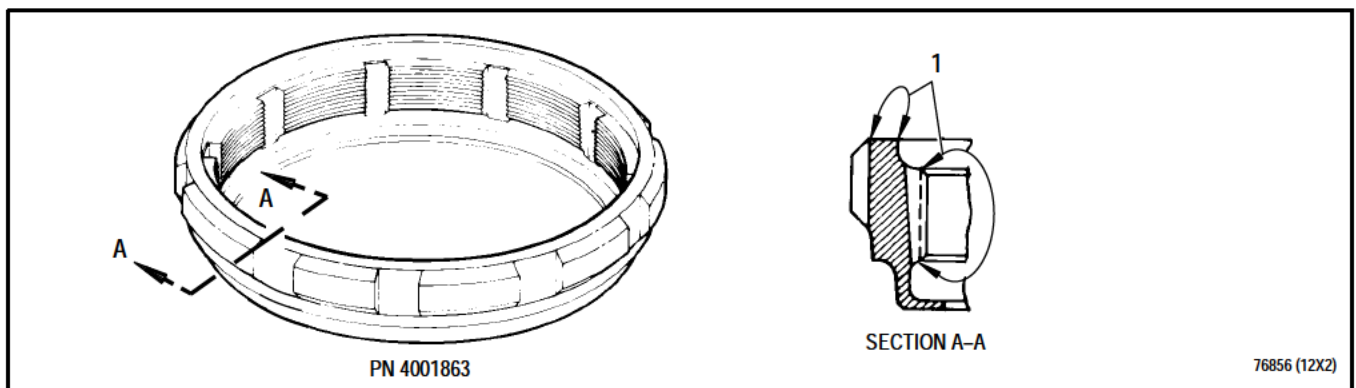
Bearing Retaining Nut (PN 4001860) - Inspection
